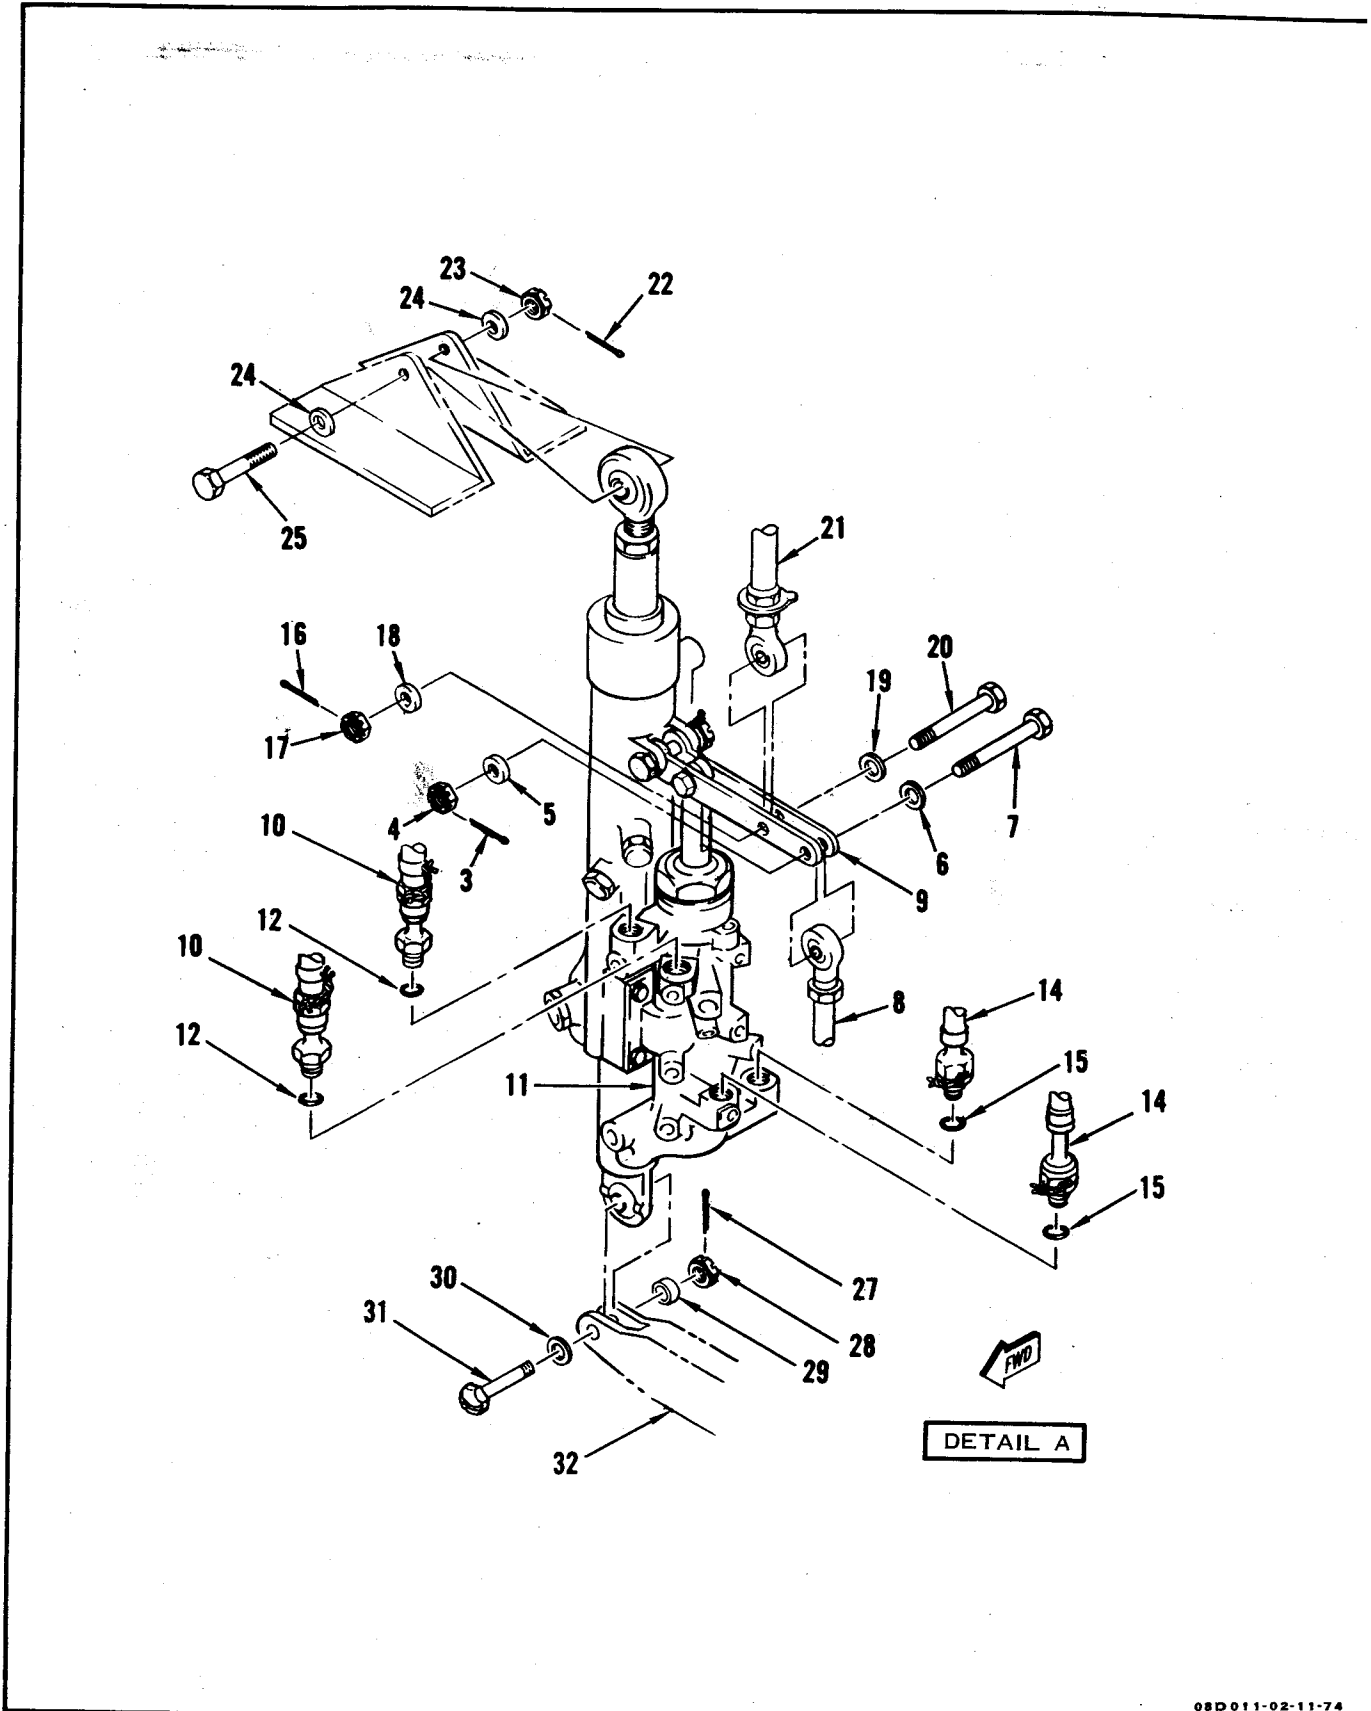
Roll Feel Isolation Actuator Removal and Installation (Sheet 2)
